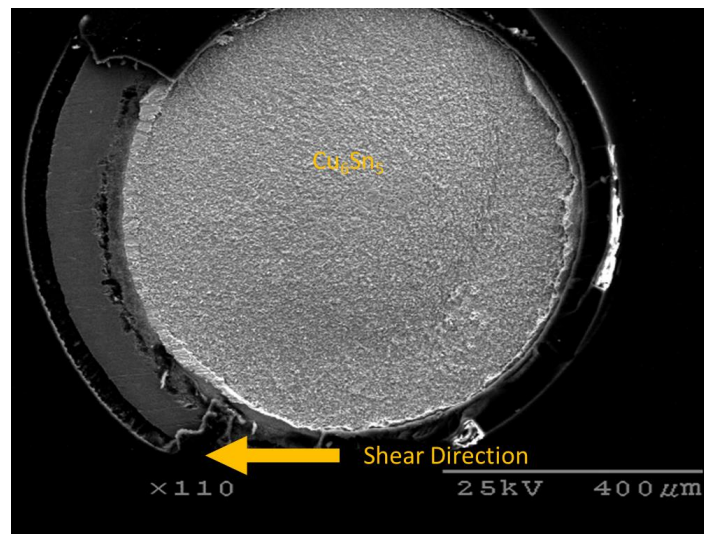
Top view of the fractured surface of the brittle failure for OSP surface finish
